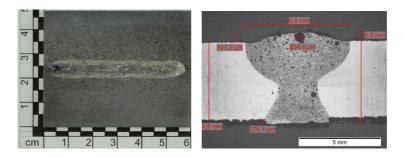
Welding of as build 90° – as build 90°: surface of weld & cross section
